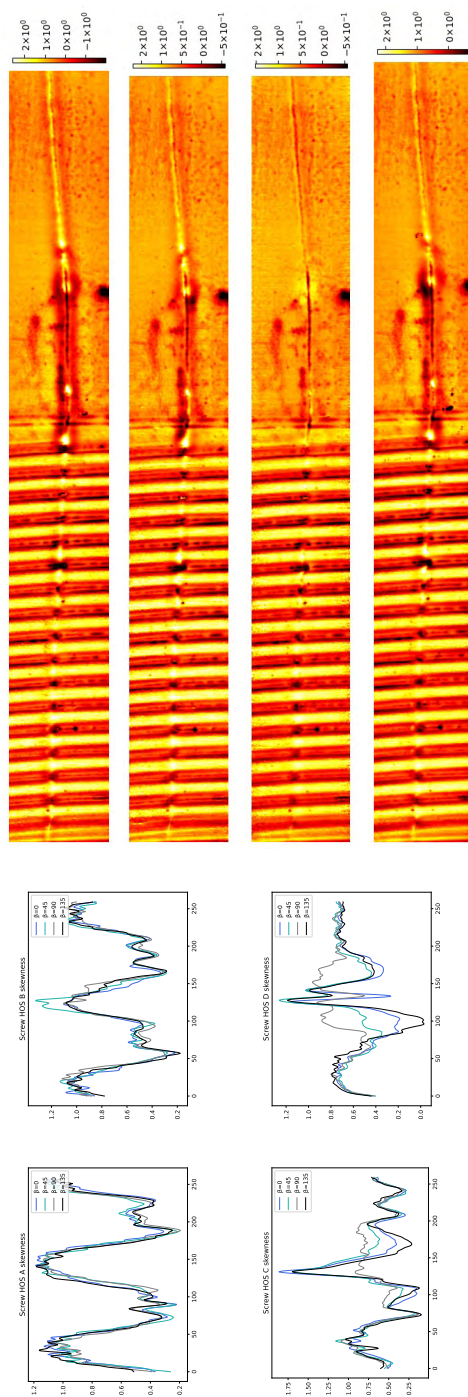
Steel screw Skewness, cooling thermogram.
